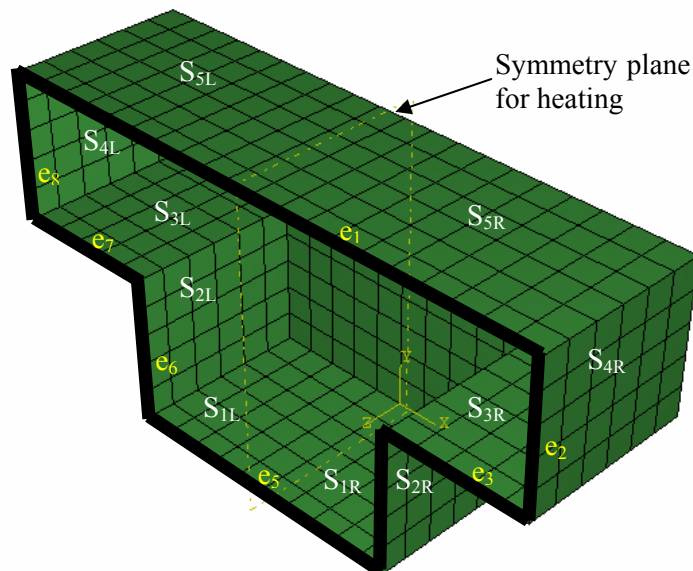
FE model for the lower part of assembly showing edges and heating surfaces.
